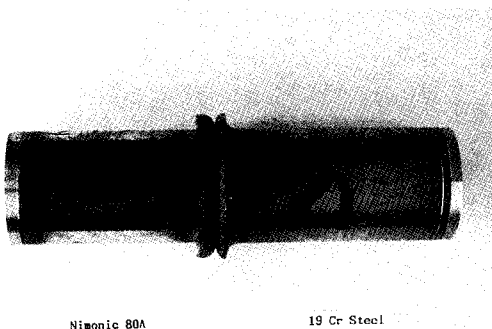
Friction welded parts showing the burr formed during welding. (Nimonic 80A-19Cr steel, Dia.=42 mm)
